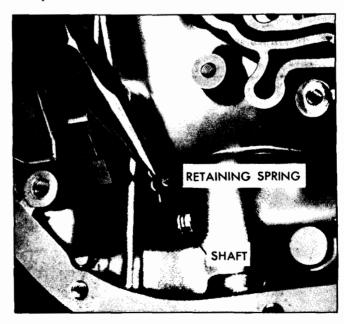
E-179 Installing Retaining Spring onto Pawl Shaft
